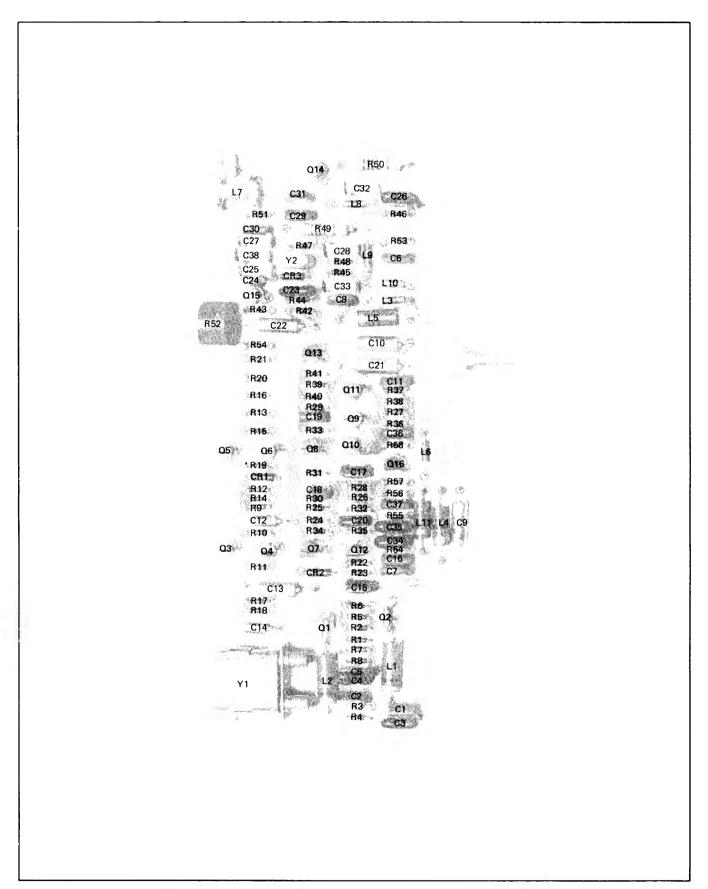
Parts Location for Phase-Locked Oscillator A14 (Change A, Serial No. 983-00446 thru 1103A00605)
